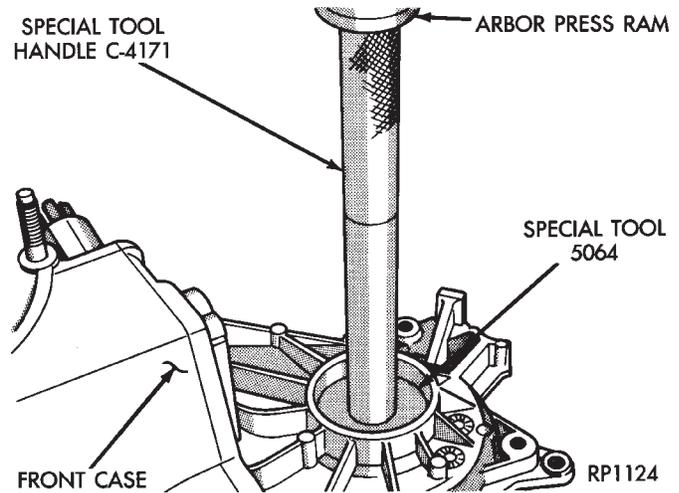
Installing Front Output Shaft Front Bearing In Case
